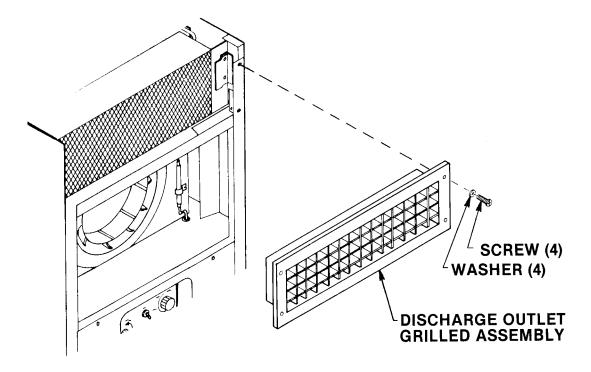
Evaporator Discharge (Outlet) Grille Assembly
